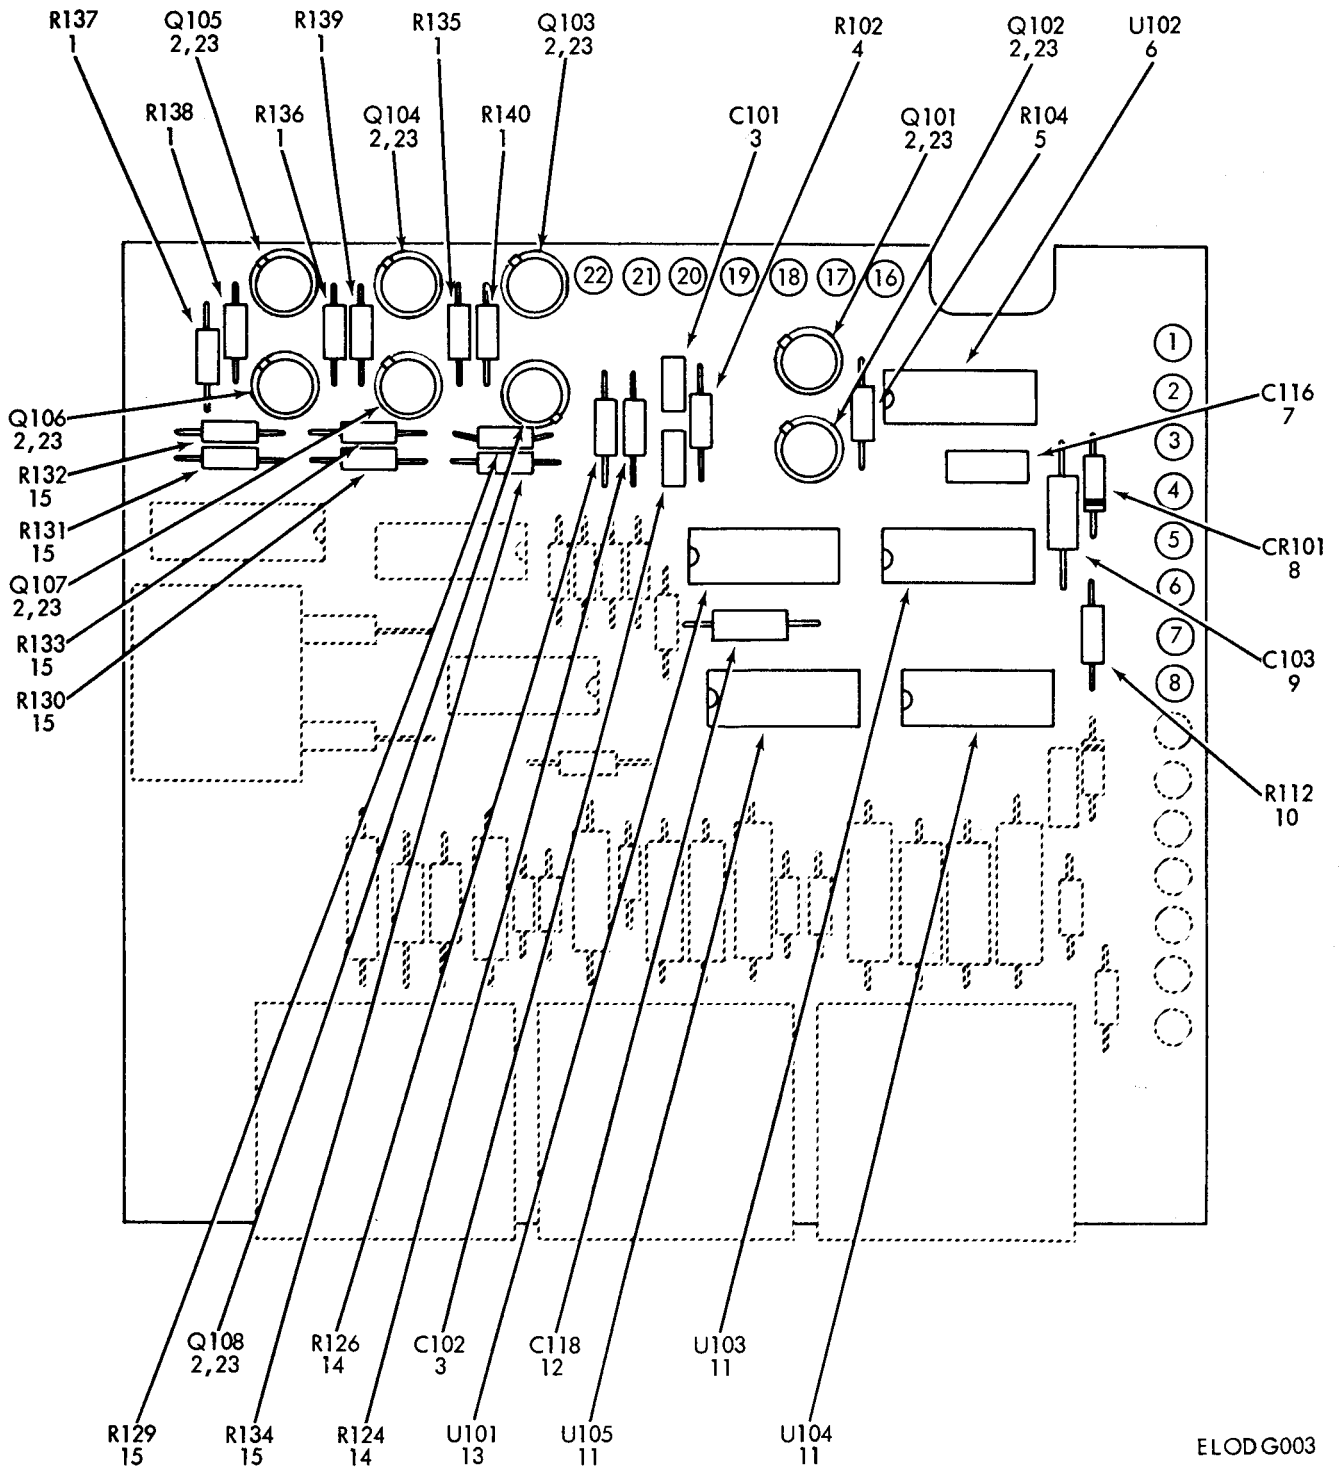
Ⓞ Printed circuit board assembly, oscillator (sheet 1 of 2).
